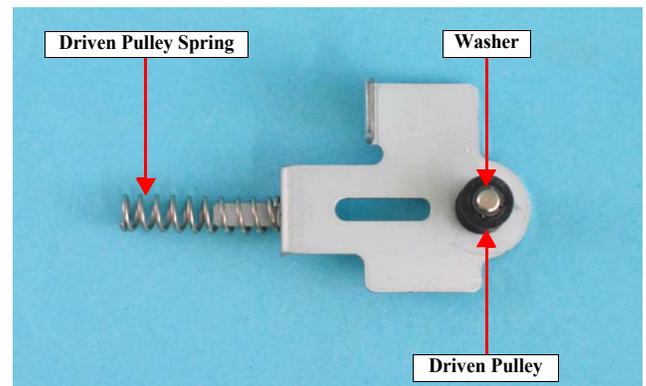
Removing the Driven Pulley and the Driven Pulley Spring
